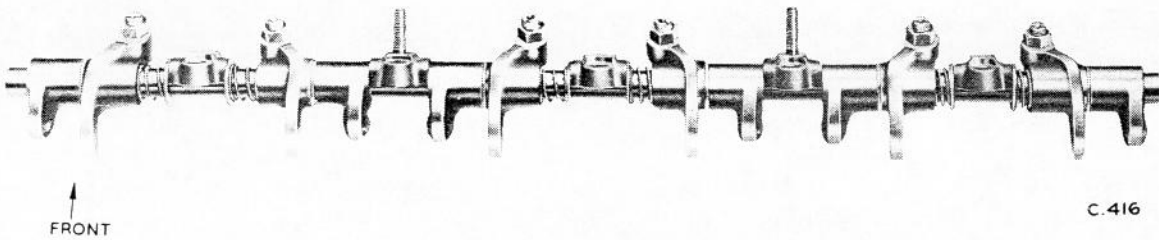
Fitting inlet rocker spindle assembly (Stage 2)
